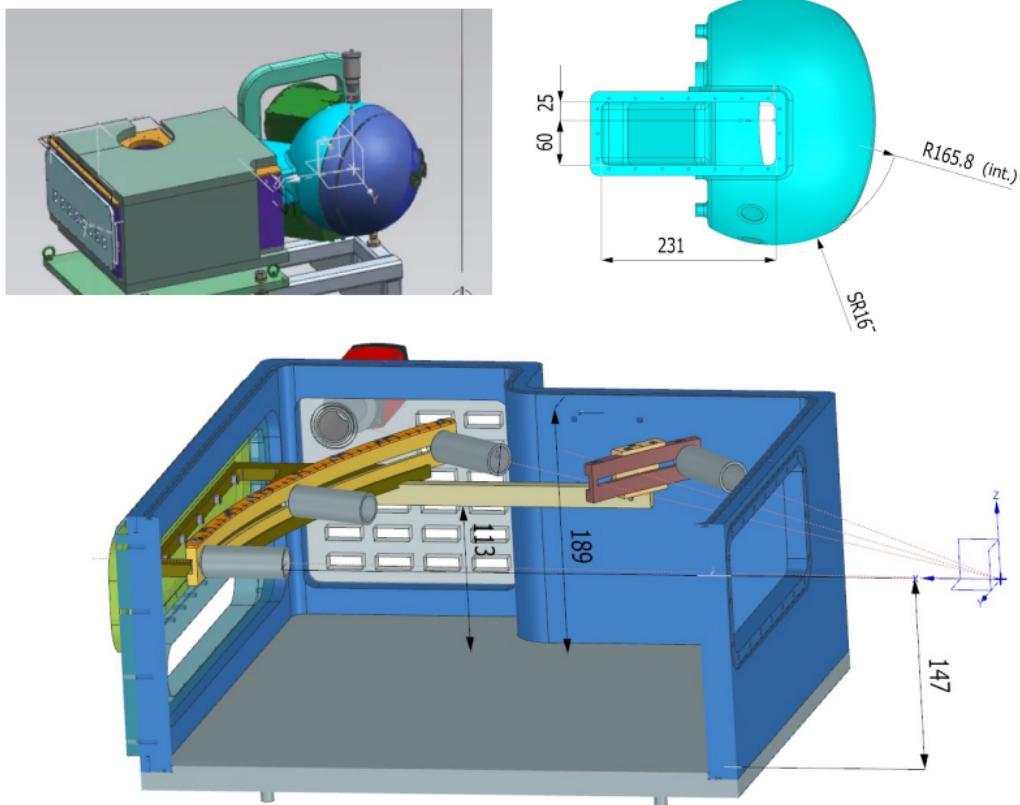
CAD drawing of the AGATA scattering chamber. Top left: view of the ensemble of the scattering chamber, expansion chamber and movable shell; top right: dimensions of the scattering plus expansion chambers; bottom: view of the expansion chamber and the beam dump available positions. Taken from [112].
